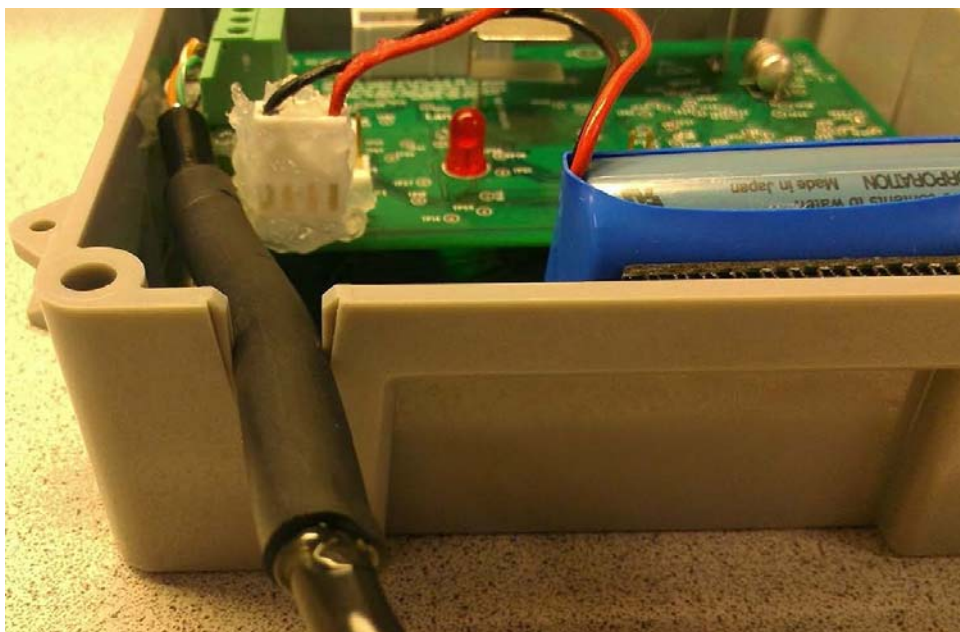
8. Heat Shrink Tubing Midpoint Pressed Into Strain Relief Slot
